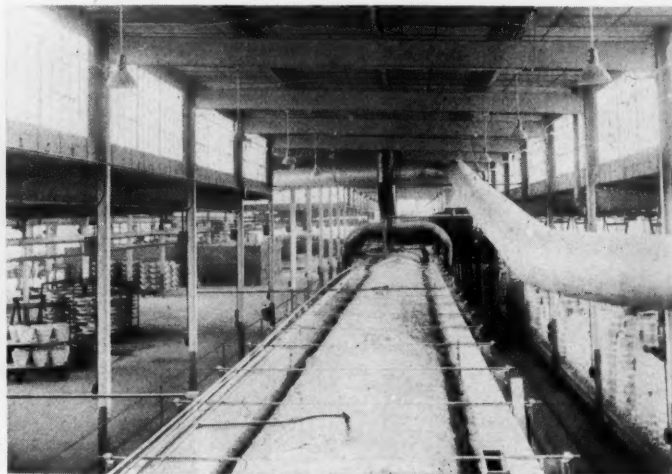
Top view of same tunnel kiln, showing location of thermocouples in roof of kiln
